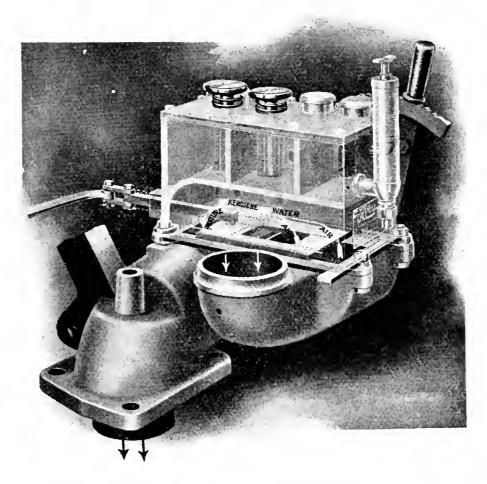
Ideal view of Higgins Carburetor as applied to Secor Motor.
